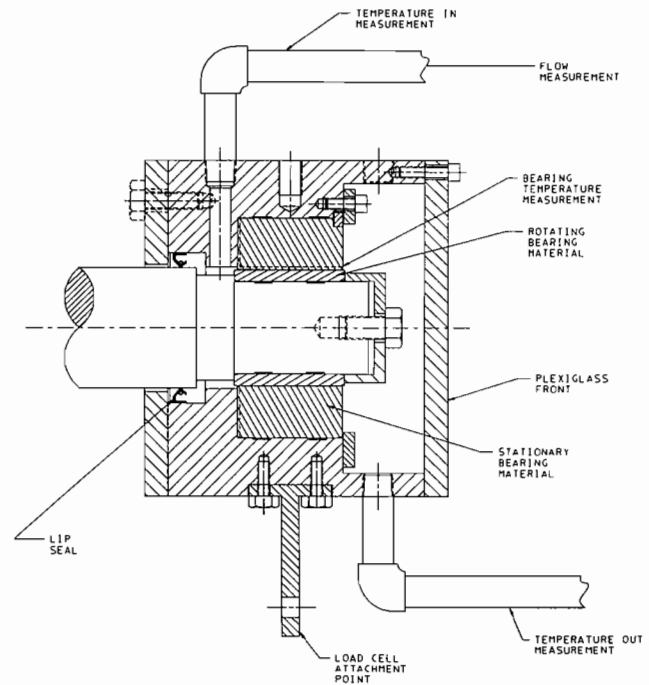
Sectional Drawing of Test Rig and Instrumentation.
